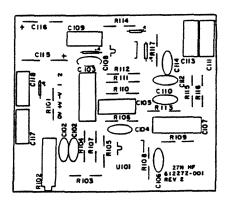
Typical Circuit Board Layout - Harmonic Filter Module
